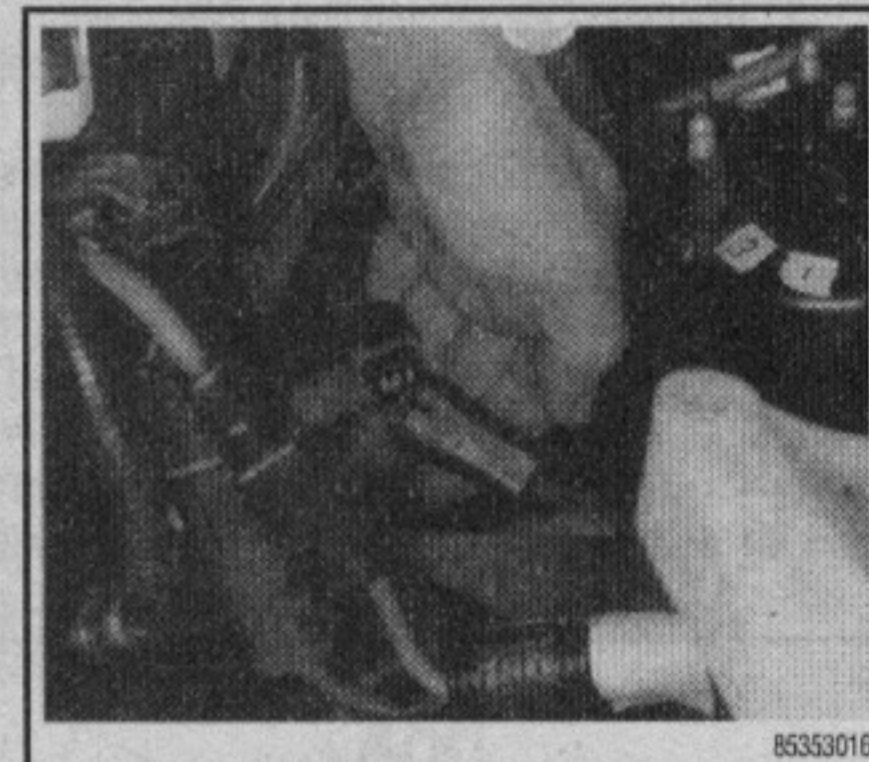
Distributor installation—1991-95 2.5L engine
